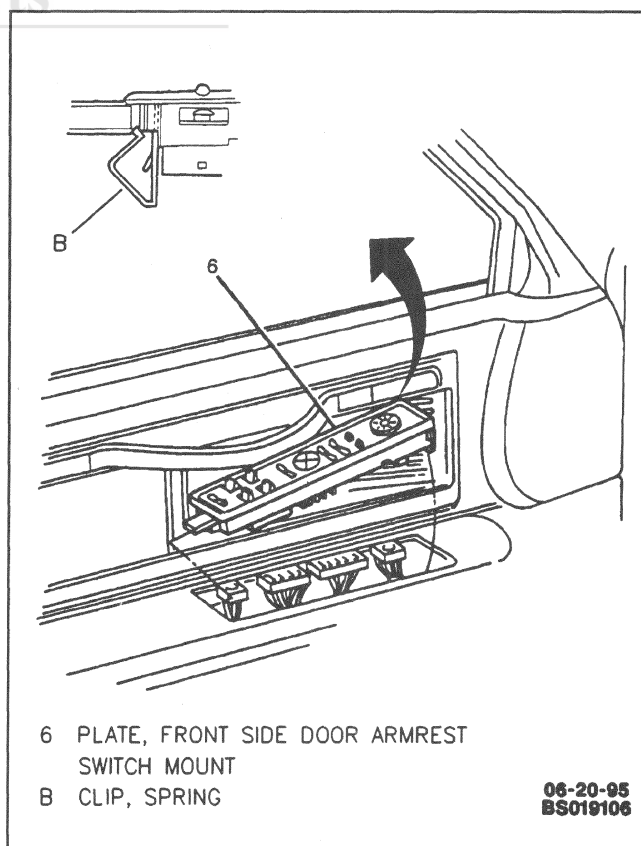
Removing Front Side Door Armrest Switch Mount Plate-(Buick)
